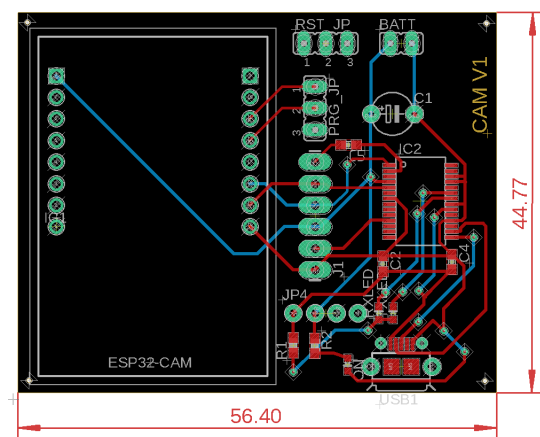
Designed camera node PCB board for ESP32-CAM breakout.
